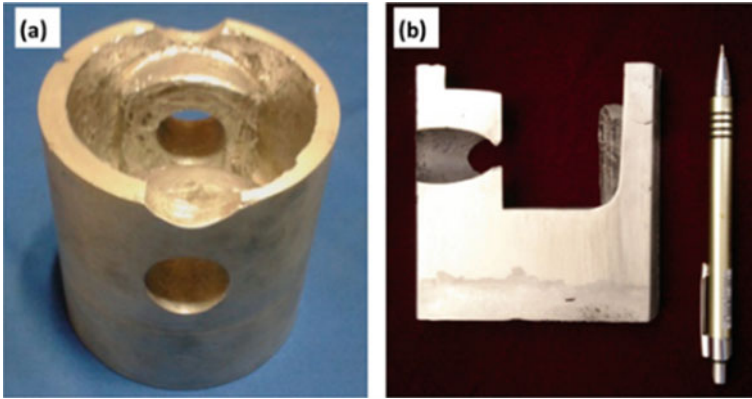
a Centrifugally casted piston Si reinforced A390 + 0.5%Mg FGM composite, b section; vertical cut cross-sectional of A390 FGM piston [22]
